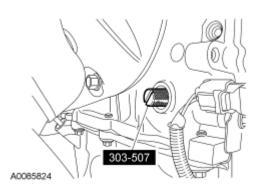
Identifying Special Tool Courtesy of FORD MOTOR CO.
